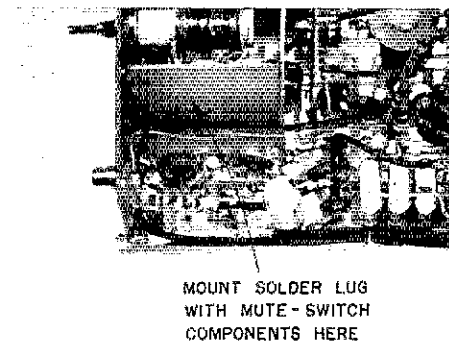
Suggested mounting position for solder lug and mute-switch components in the Universal Receiver. The mute jack is mounted on the rear panel above the antenna jack and the earphone jack.
